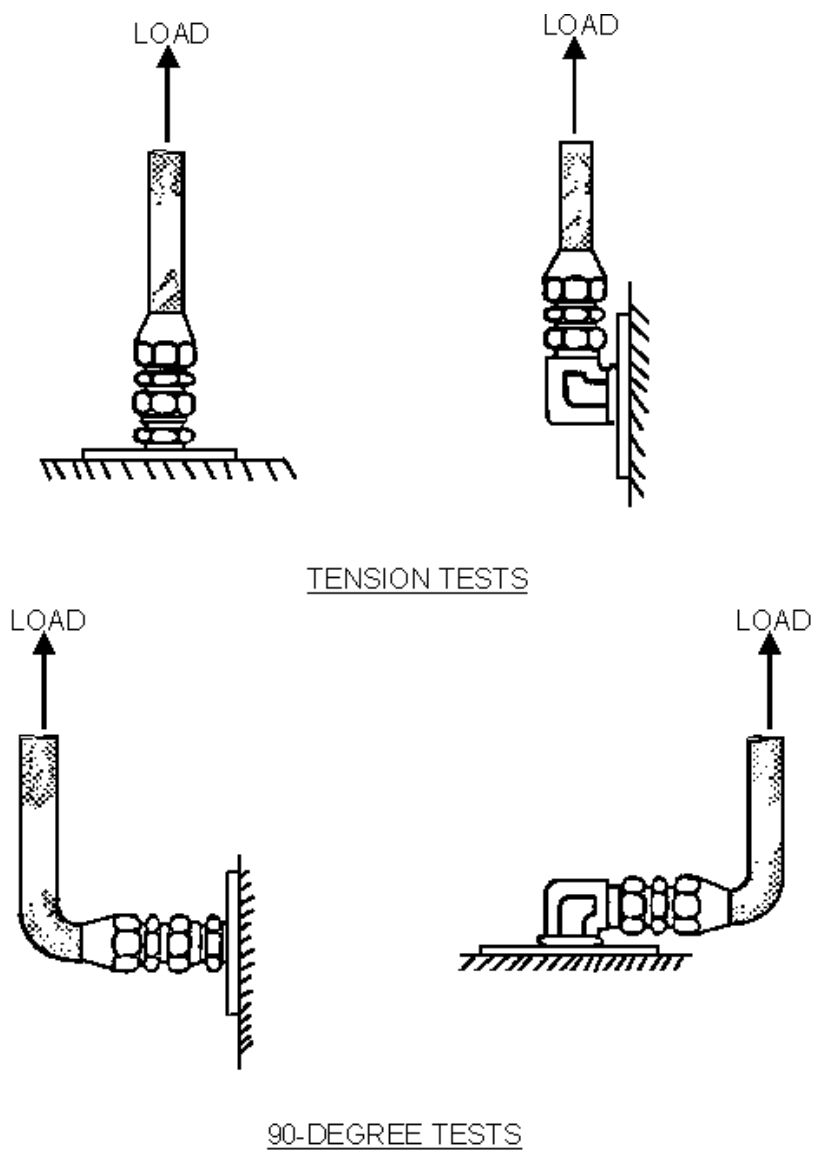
HOSE ASSEMBLY TESTS
